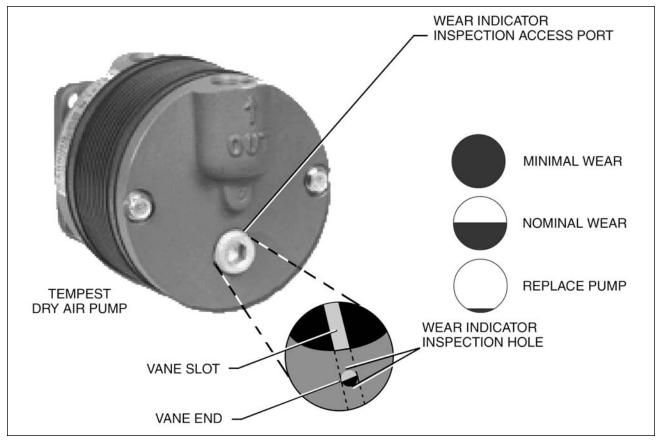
215/216 Series Vacuum Pump Vane Wear Inspection
